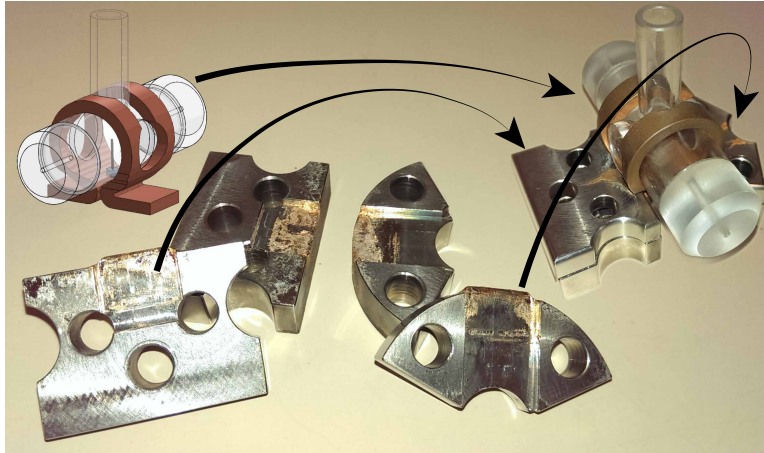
A coil assembly fits inside a split clamp. Several screws that pass through the clamp halves tighten the clamp and secure the coil by engaging threads on the UCP.
